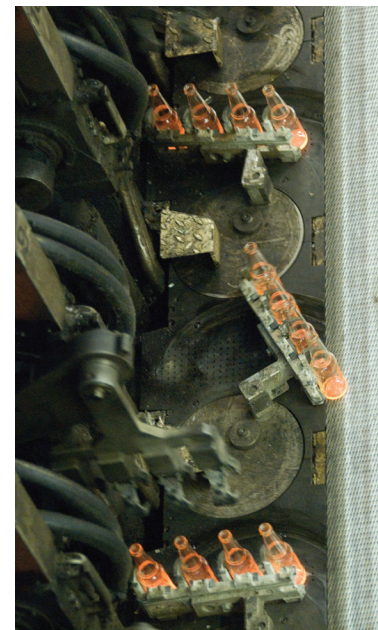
90° PUSHER MECHANISM - 117-D-34
